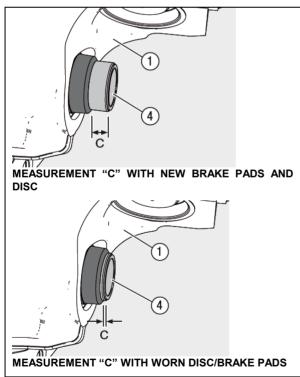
BRAKE PAD WEAR CHECK ON DRIVE AXLE
